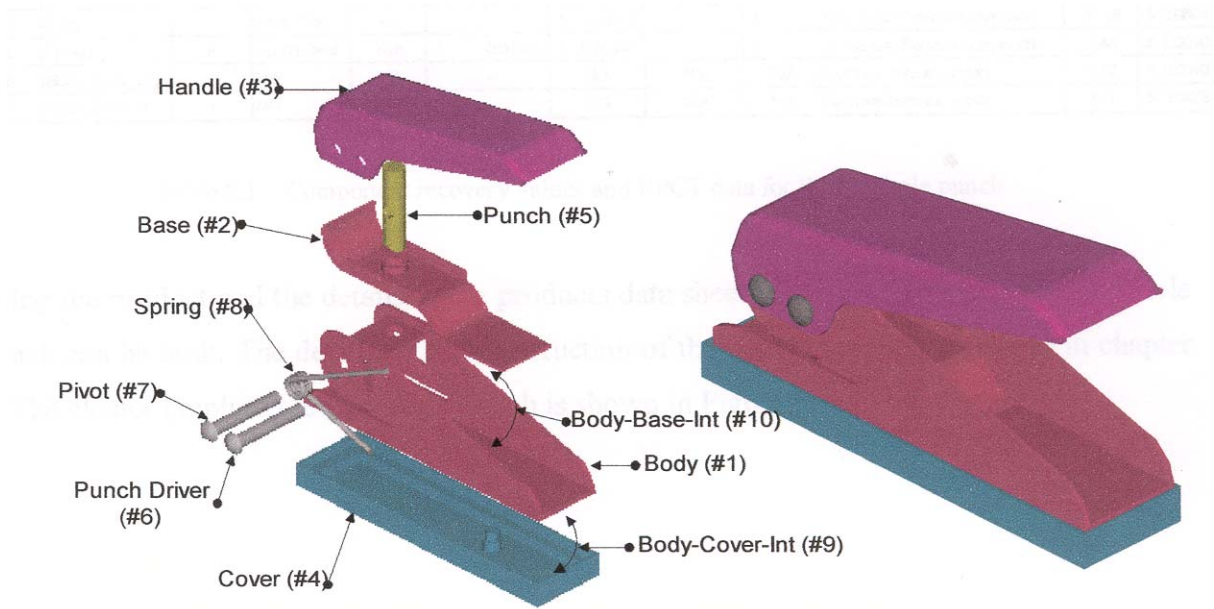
Exploded and assembled view of the one-hole punch [O'Shea et al., 1999].
